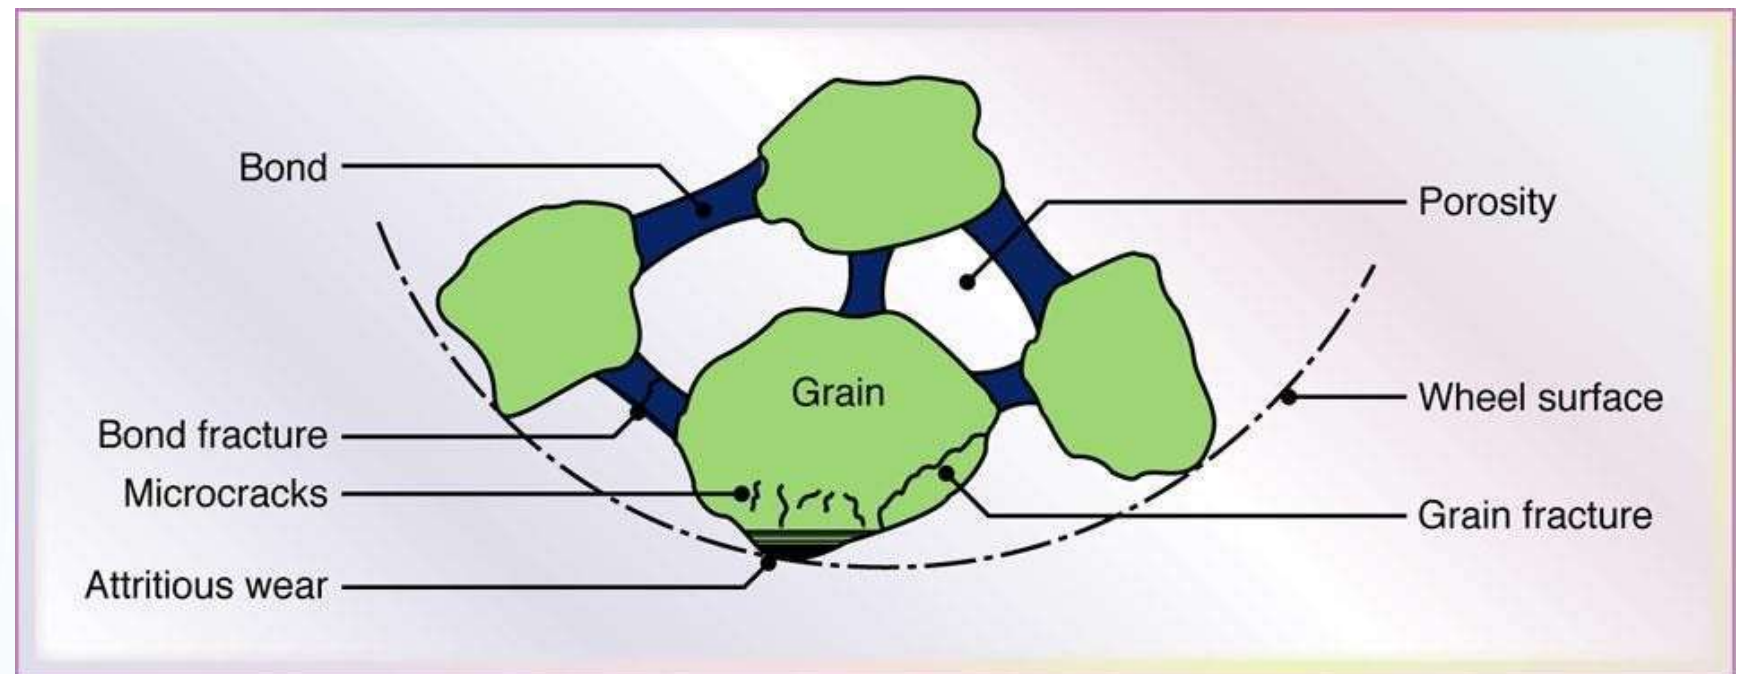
Schematic illustration of a physical model of a grinding wheel showing its structure and wear and fracture patterns.
